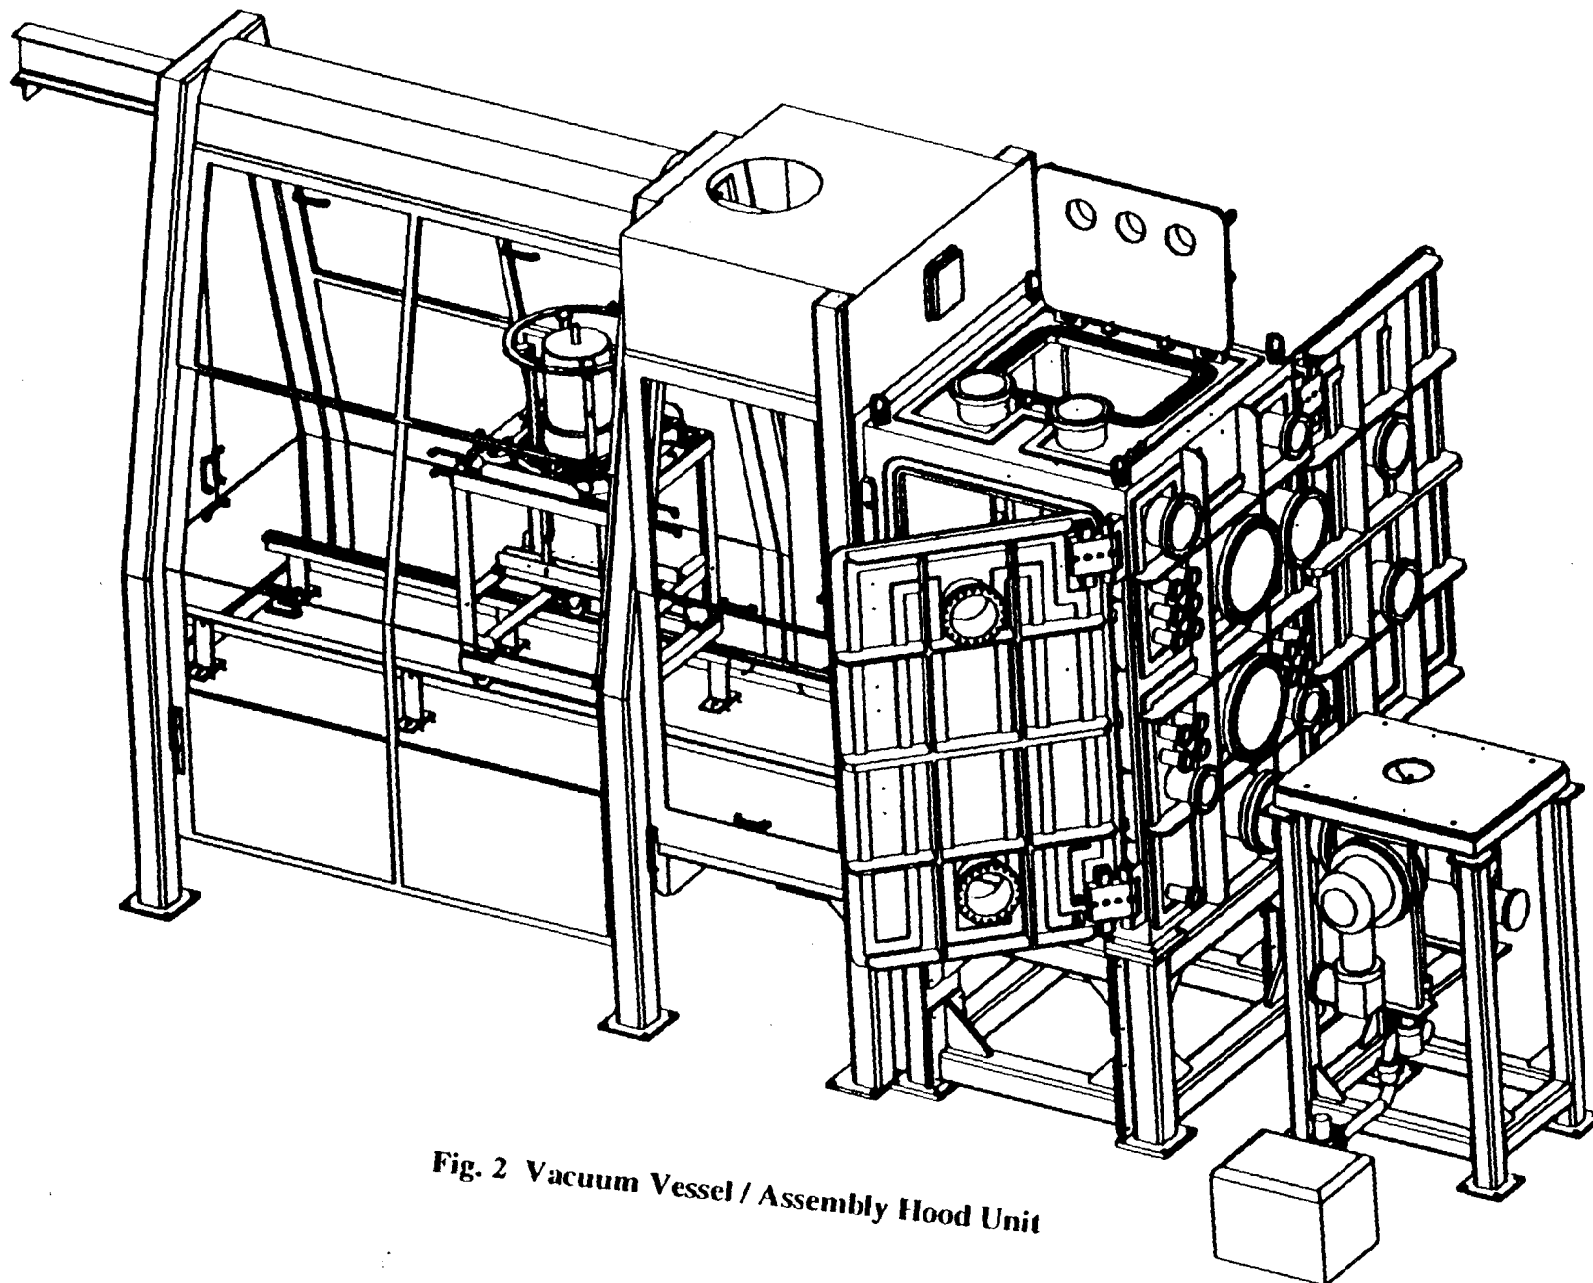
Vacuum Vessel / Assembly Hood Unit
